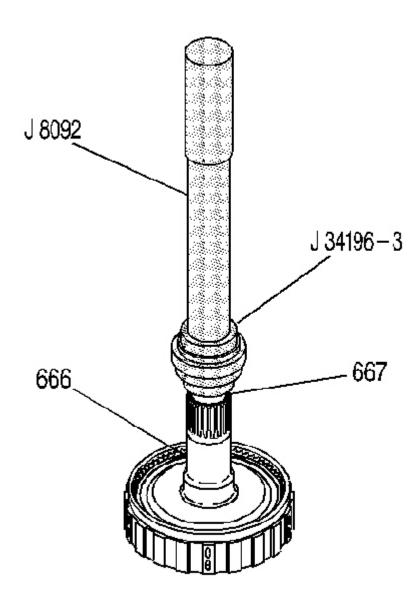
View Of Reaction Carrier Shaft Rear Bushing Courtesy of GENERAL MOTORS CORP.
